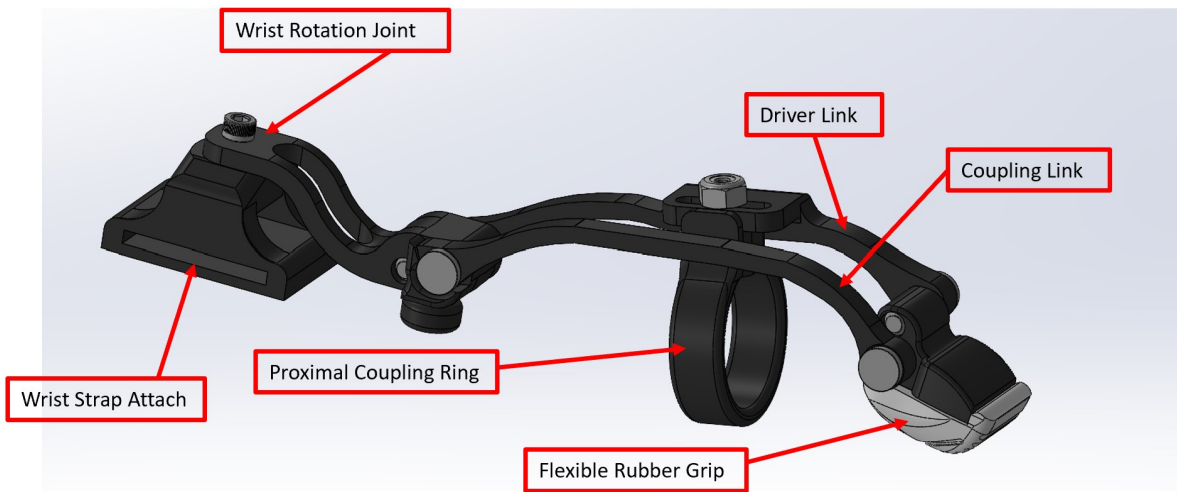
The isometric views of the passive mechanism prototype for the index and middle fingers printed out of TPU.
